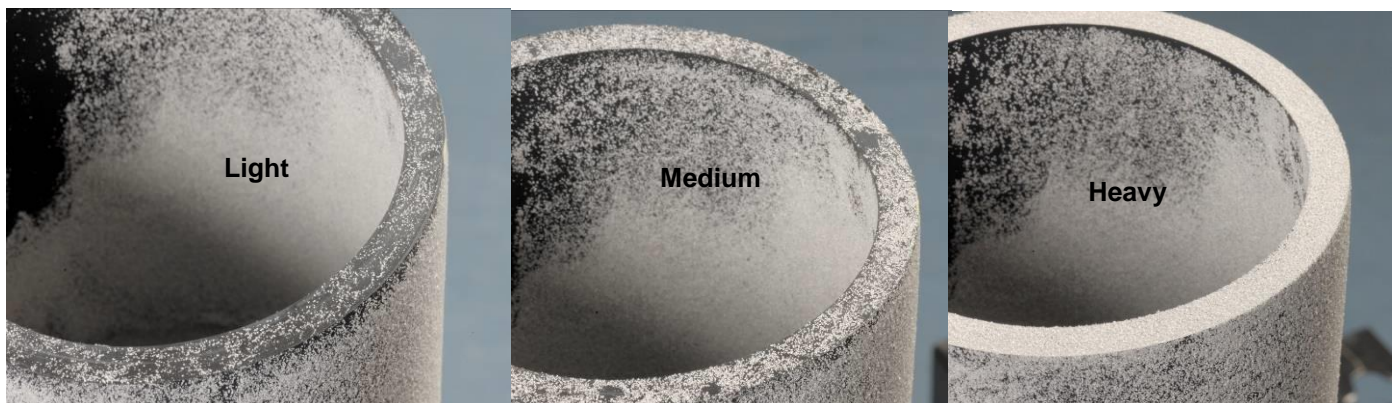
Standard sand-contaminated pipe samples for butt fusion welding.
